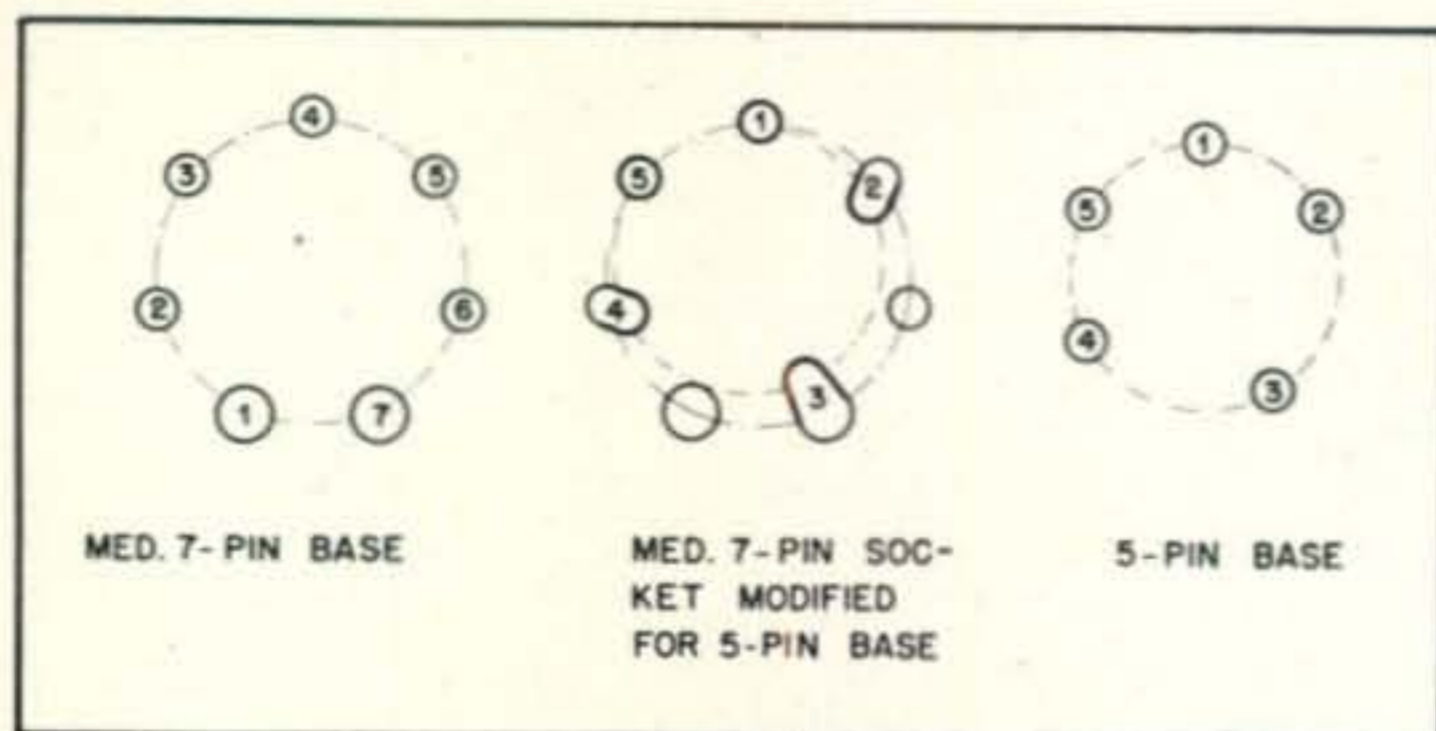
7-pin 1625 sockets may be modified to take 807s. In the scale drawing, the center illustration shows the 5-pin socket superimposed on the 7-pin, with the three holes filed to fit.
